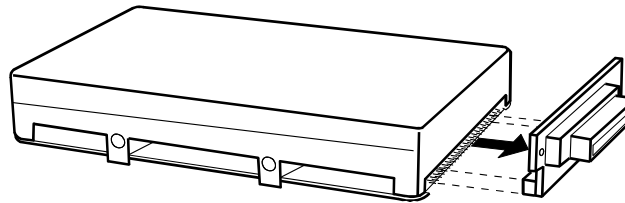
REMOVING THE HARD DISK DRIVE CONNECTOR CARD
